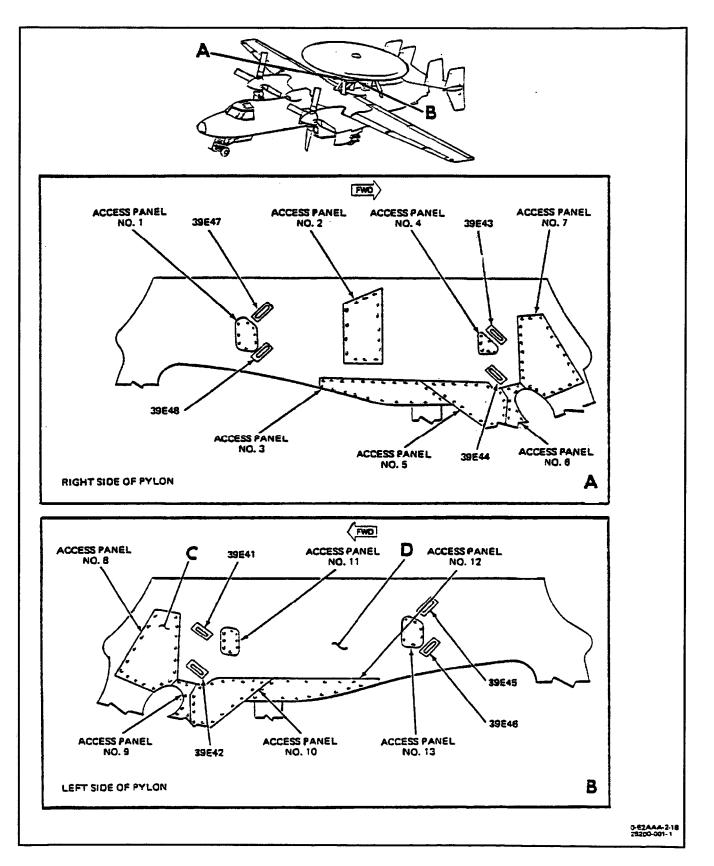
Removal and Installation of Configuration 1 Power Splitters and Cable Assemblies (Sheet 1 of 3)
